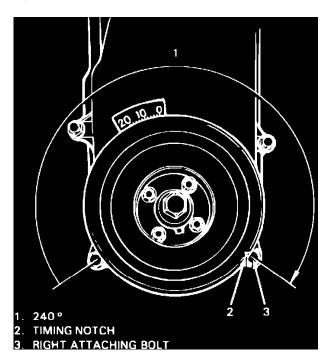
Crankshaft pulley alignment w/right side timing belt cover bolt
